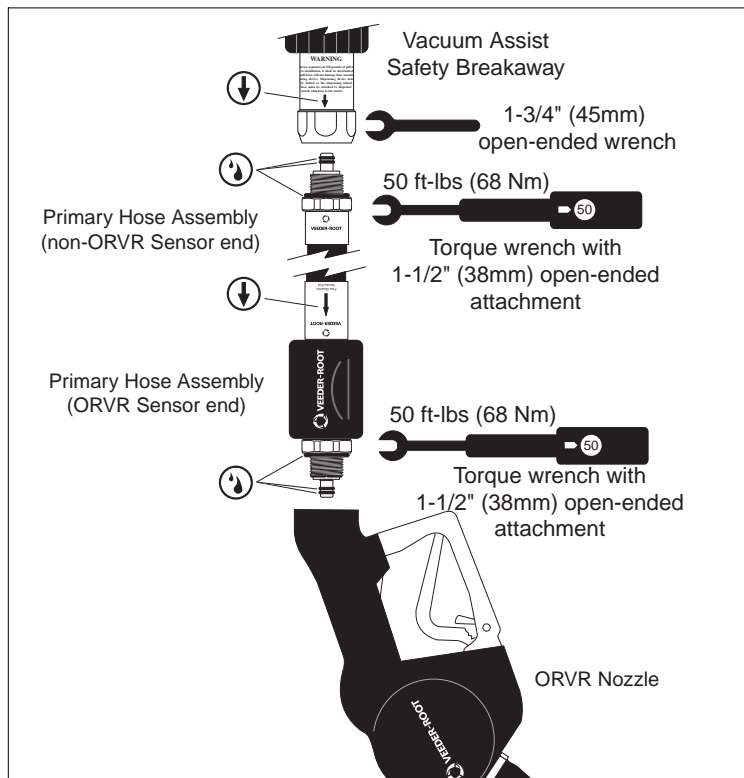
Connecting Primary Hose Assembly with ORVR Sensor
